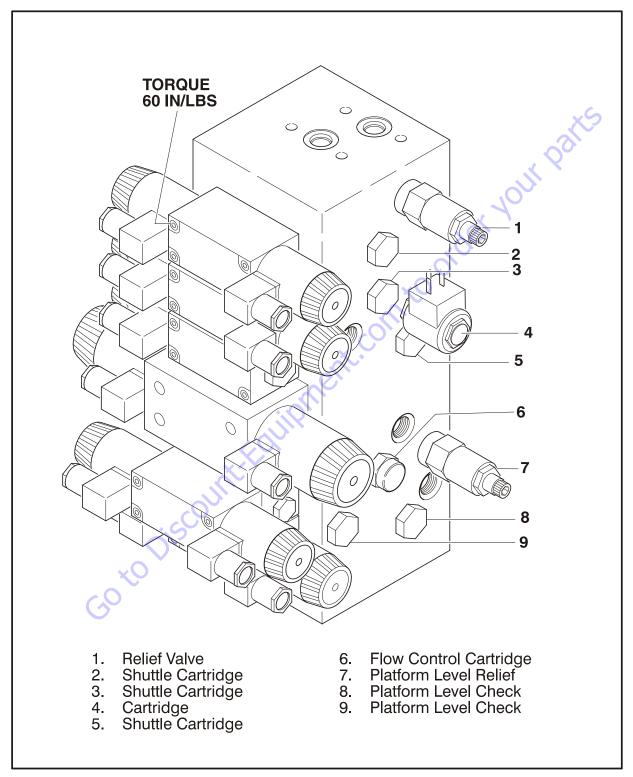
Location of Components - Main Control Valve (Sheet 1 of 2)
